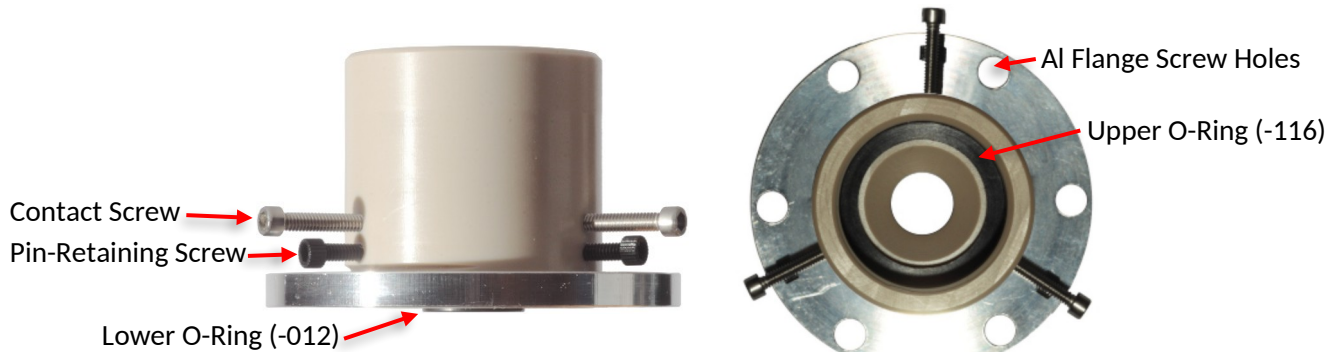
Side view. Ensure the Al flange is flush with cell base and O-Ring protrudes slightly from base.
